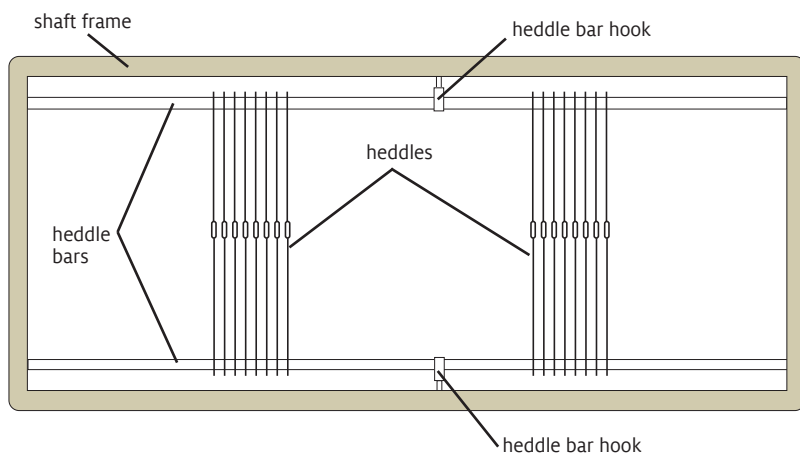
REMOVING AND ATTACHING SHAFT FRAMES
